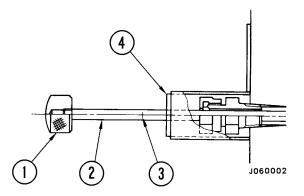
REAR BRAKE WEAR 1. Air Bleed Plug 2. Brake Housing
